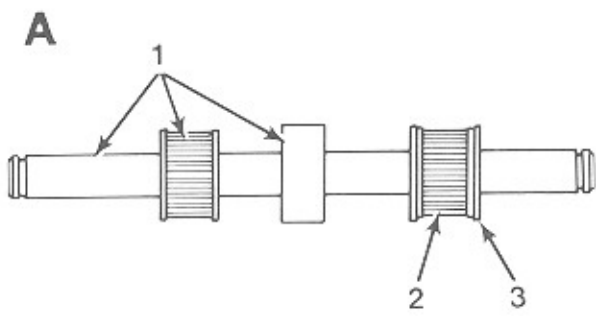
OBA—4 Transport Roller And Shaft Assemblies
